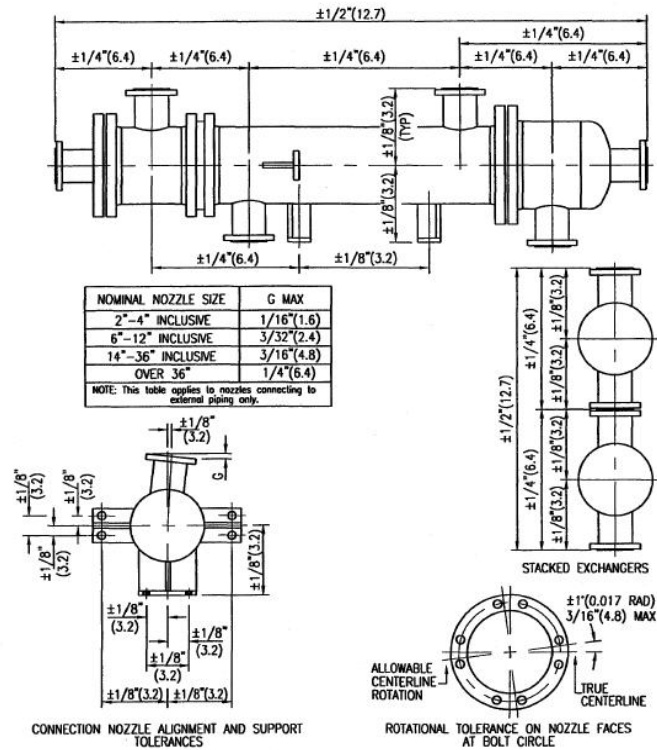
TEMA Fabrication Tolerances for shell-and-tube heat exchangers
